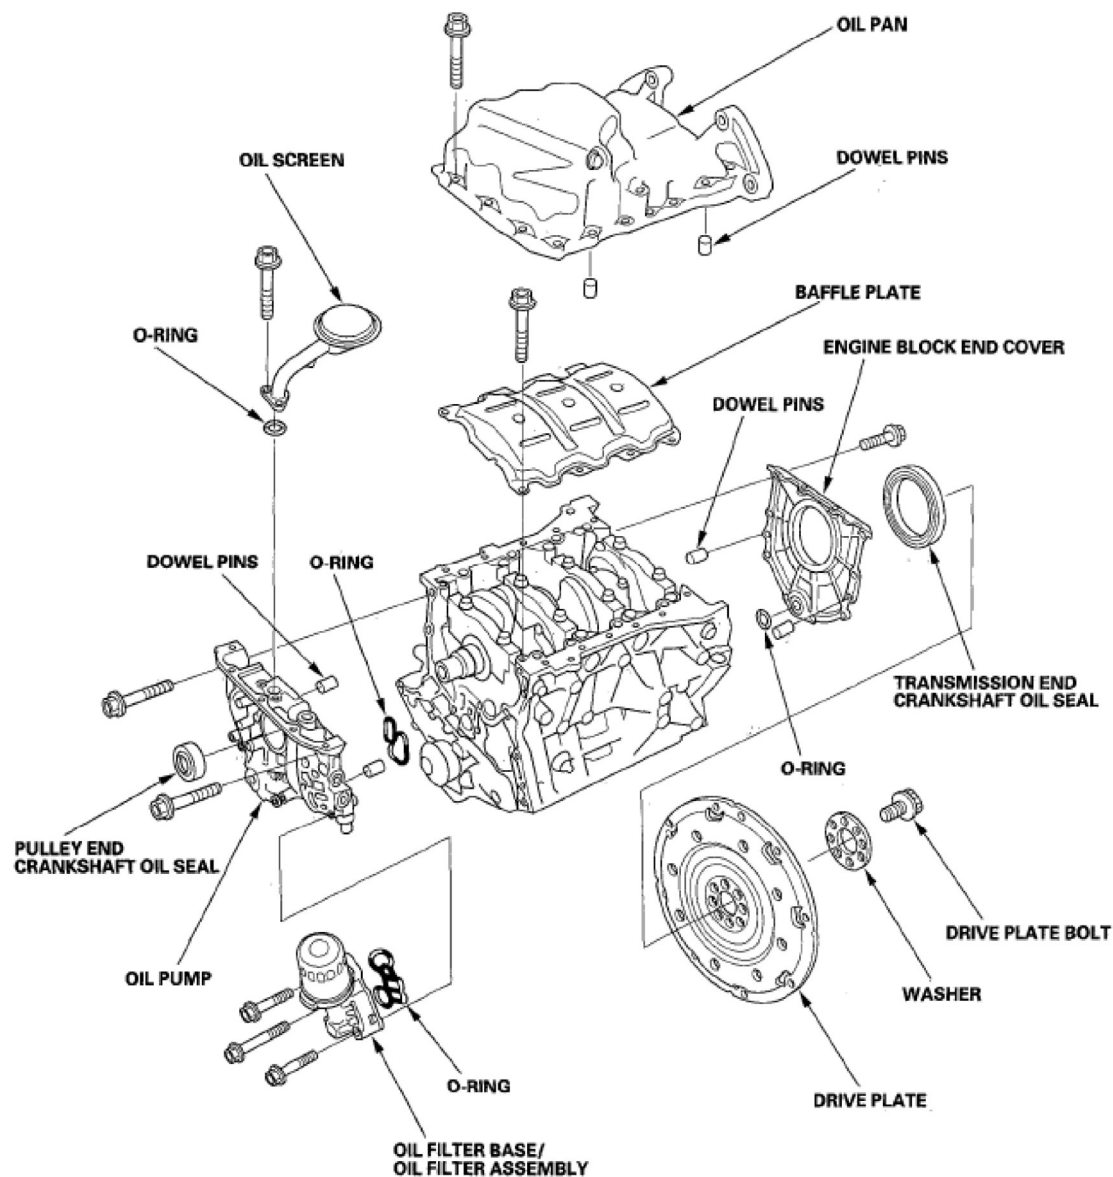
Identifying Engine Block Component Location - '07 Model J35A7 Engine
